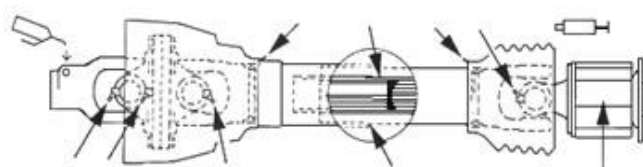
Lubrication of the PTO shaft as specified by the manufacturer
